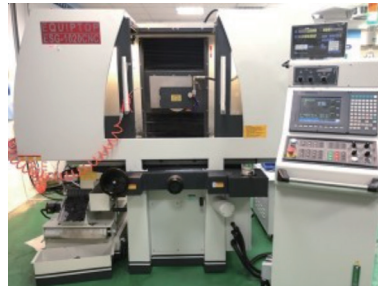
(Color online) High-speed precision CNC surface grinding machine (ESG-1020CNC) used in grinding experiments.
